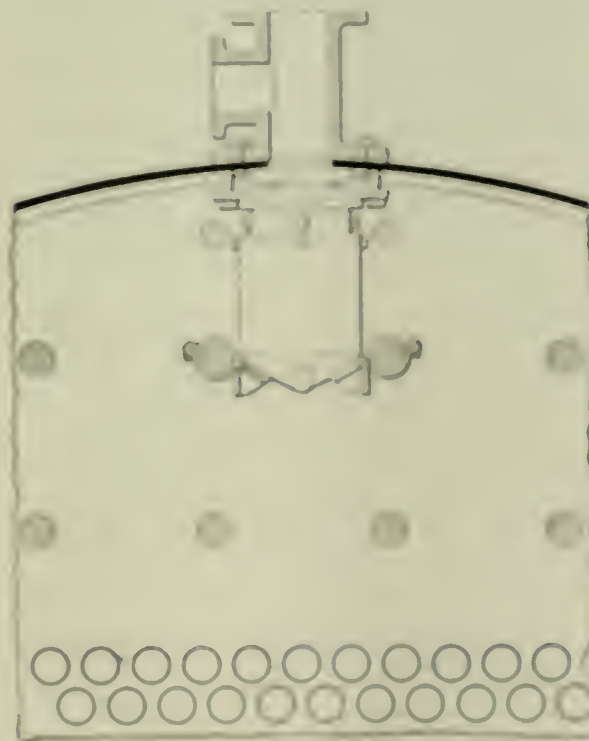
DRIER INSTALLED IN SCOTCH BOILER
